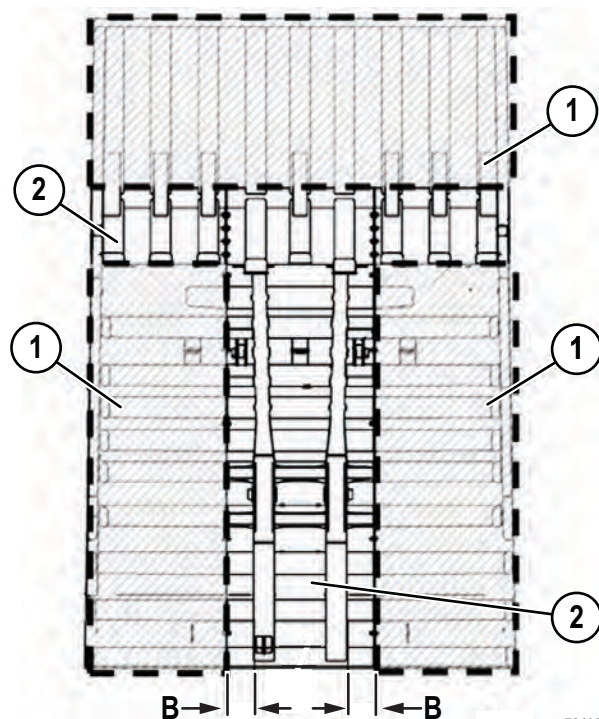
WELDING AREAS ON DUMP BODY
